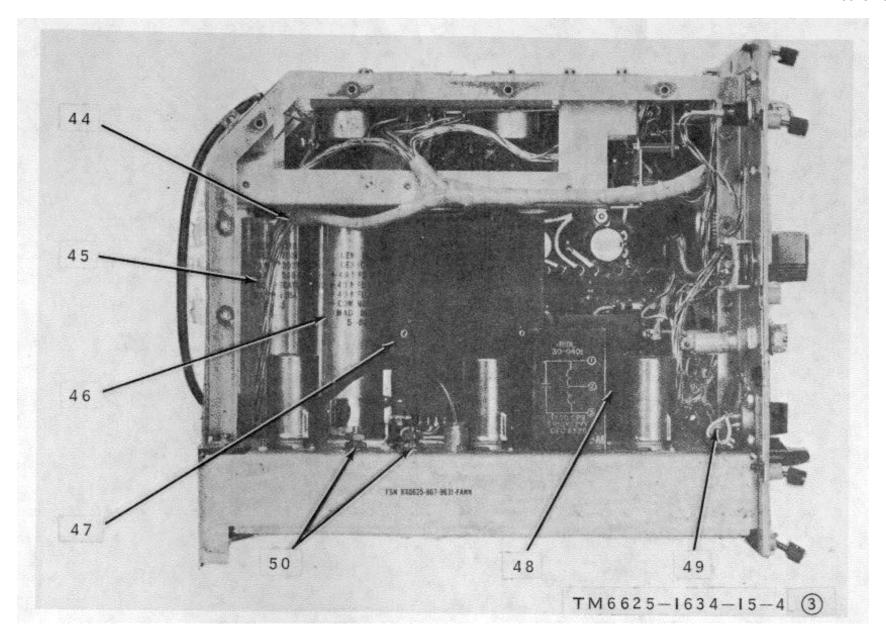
(3). Electrical equipment chassis (sheet 3 of 4).
